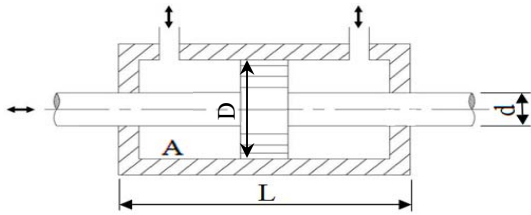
Schematic drawing of double acting, double rod hydraulic cylinder. ID = 80 mm, d = 45 mm, L = 190 mm, $p_{max.} = 210$ bar, $A = 3436.116965 \text{ mm}^2$
